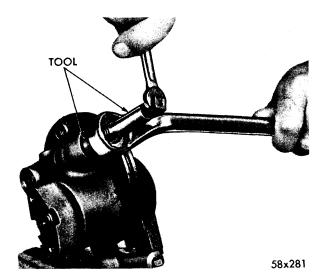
Removing Flow Control Valve Plug with Tool C-3655
